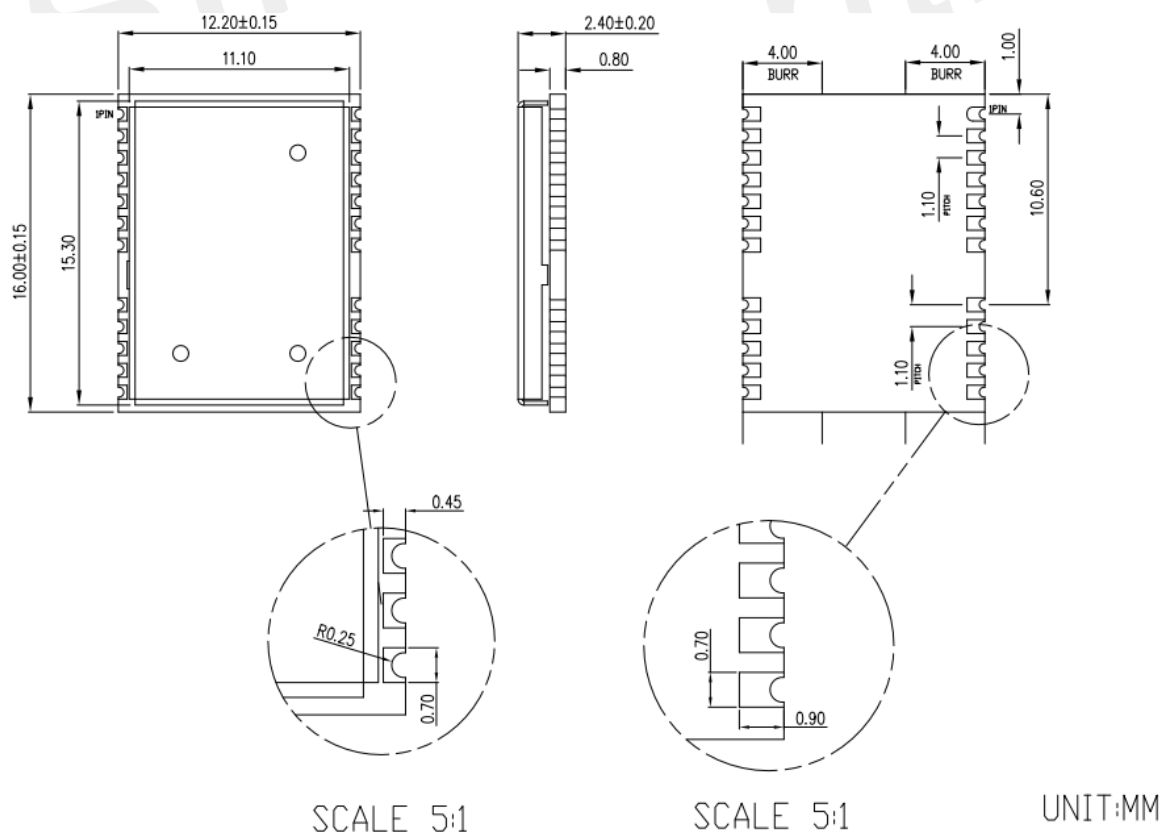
SIM66D mechanical dimensions (Unit: mm)
